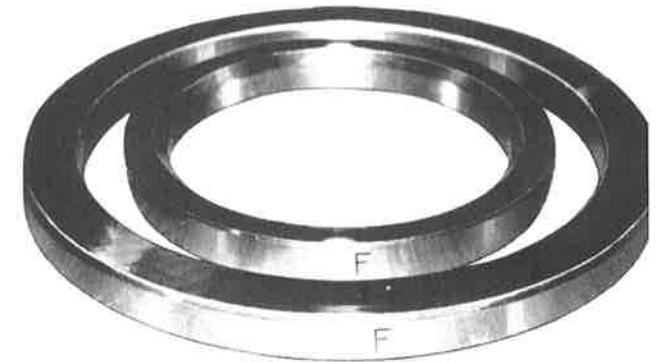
Marks on the spacer and washer Disassembly of thrust bearing
